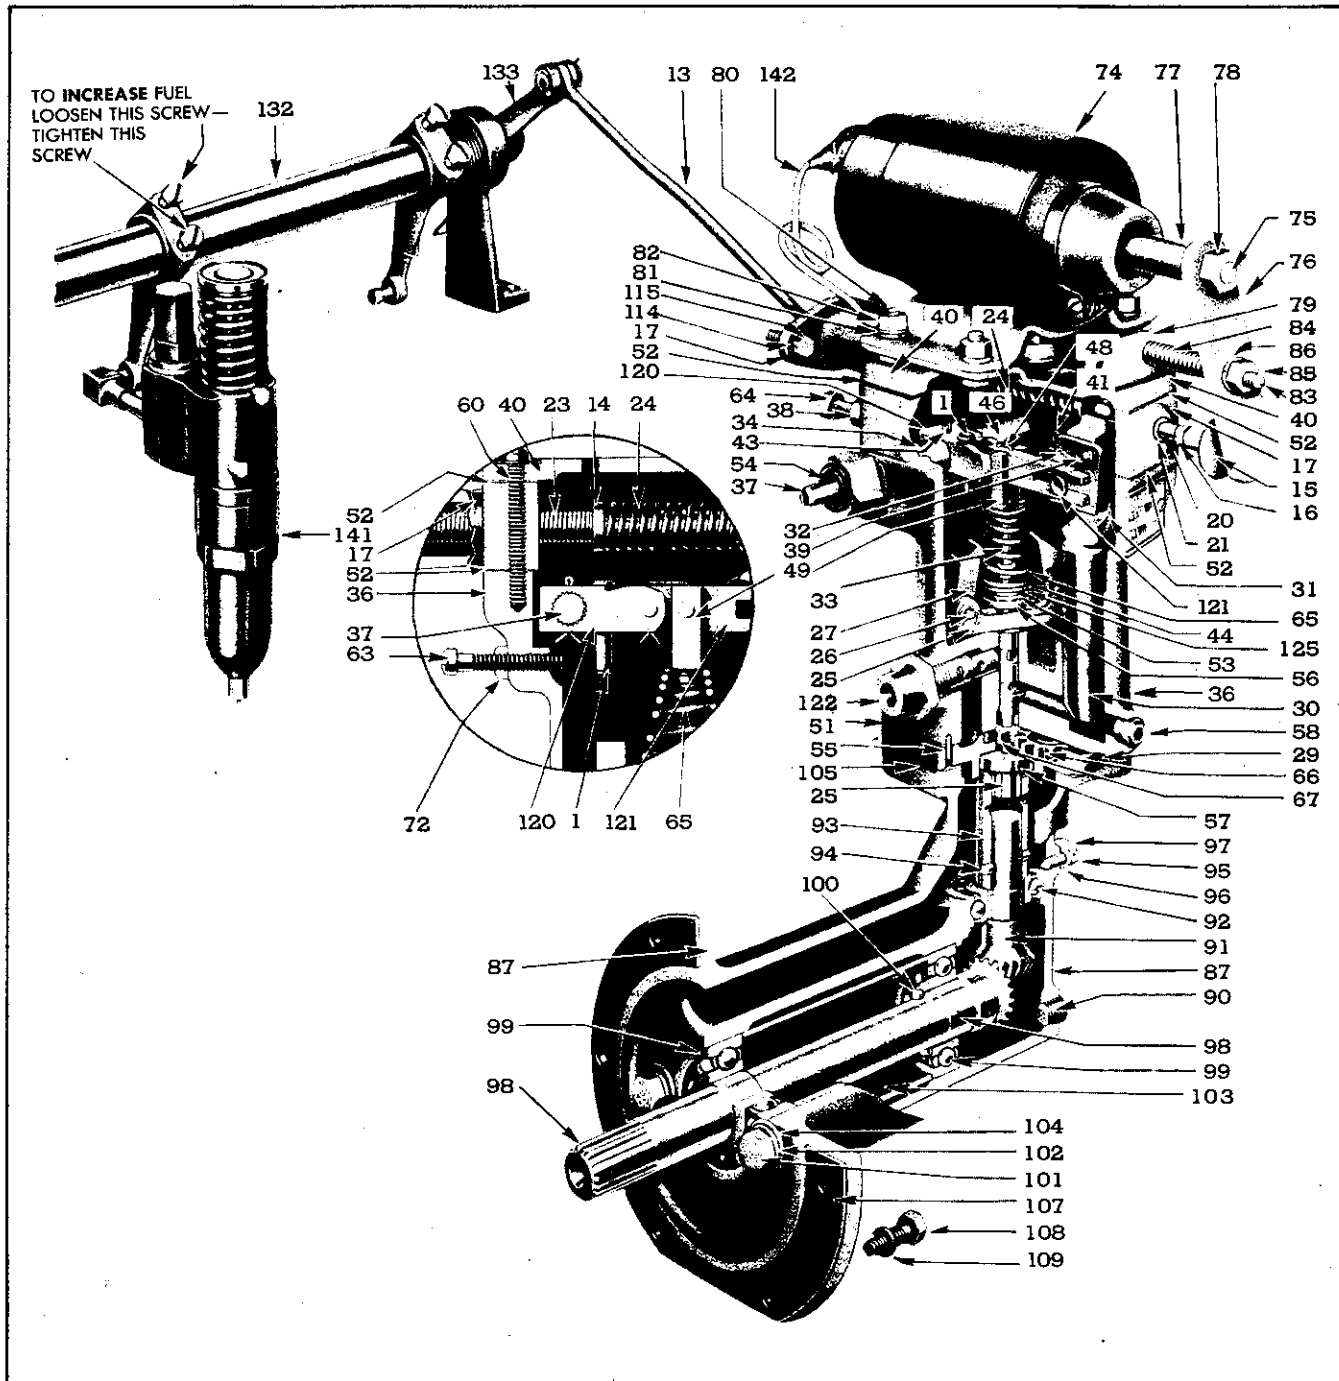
Hydraulic Governor Assembly Including Starting Solenoid and Governor Drive Mechanism.
